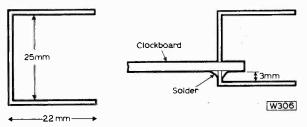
To attach the Display board to the Clock board, two pieces of stiff 22SWG wire are bent to the above shapes and soldered as shown.
